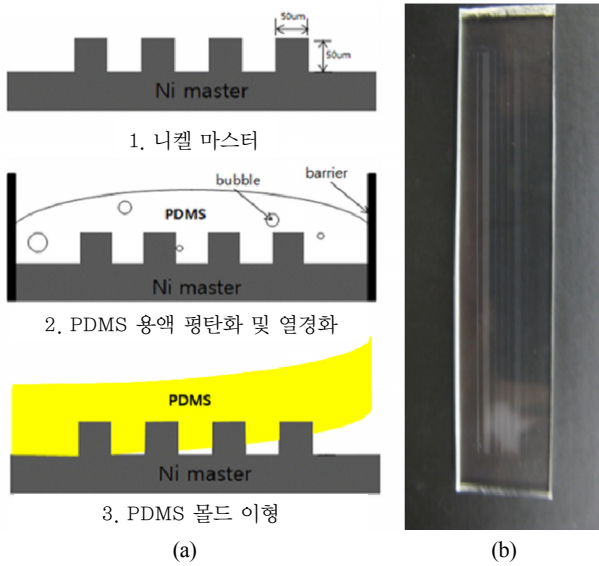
(a) PDMS mold fabrication process, (b) PDMS mold.
